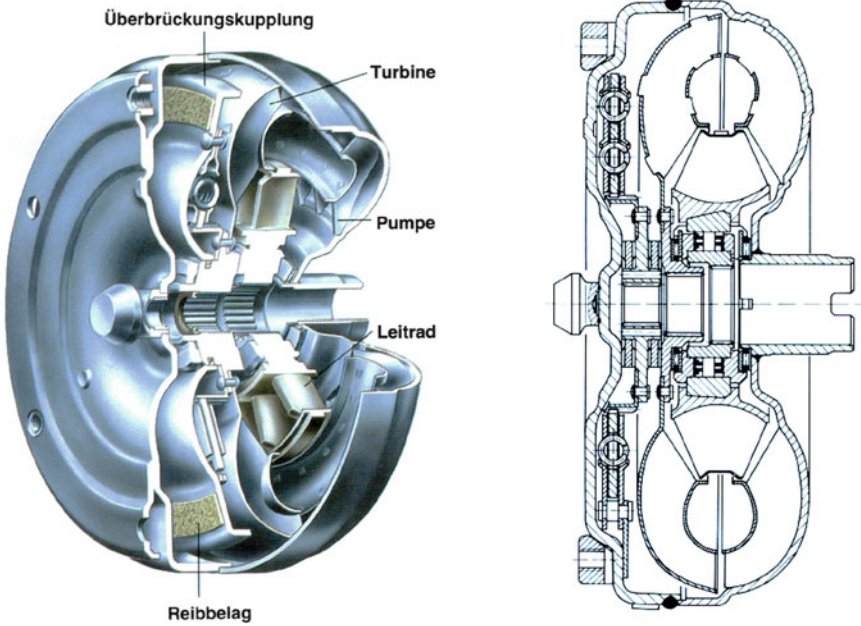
Sketch of a typical torque converter with free-wheel clutch [11]
